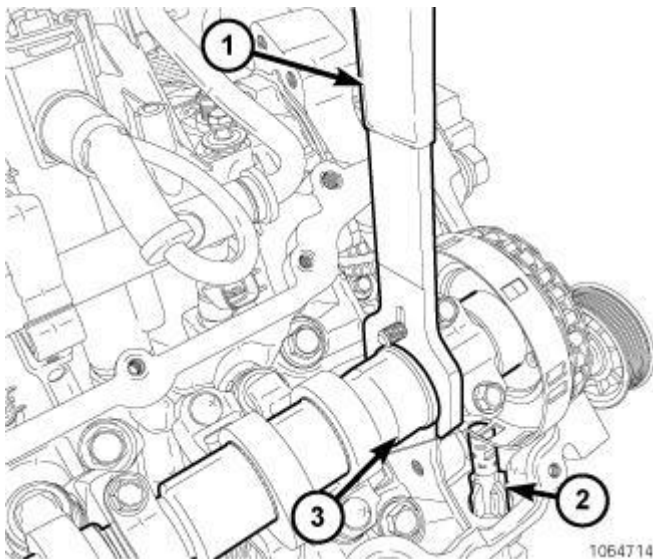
Removing/Installing Cam Sensor & Camshaft Sprocket Bolt Using Spanner Wrench
